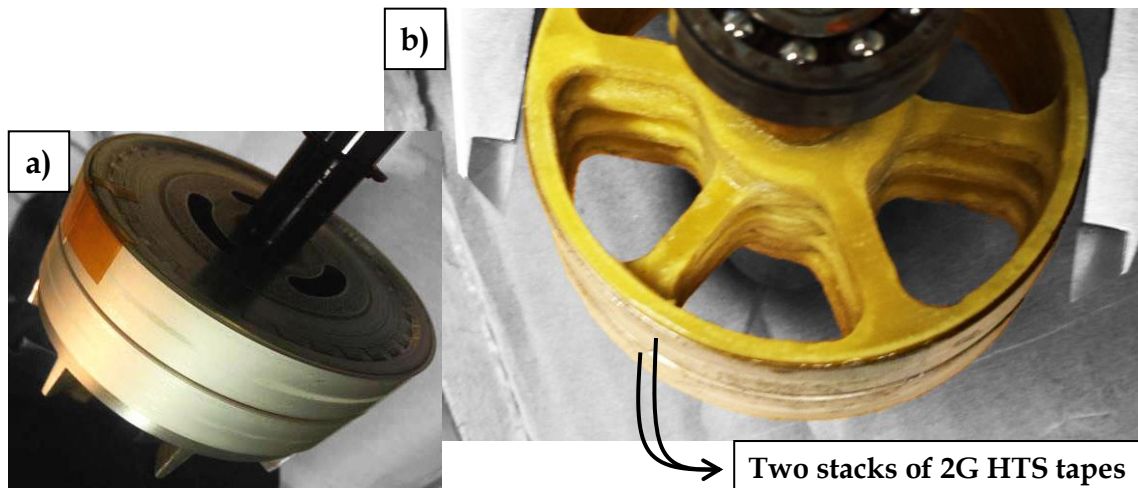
Motor rotor: before (a) and after (b) applying the stacks of 2G HTS tapes.
